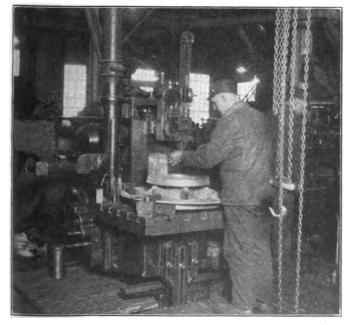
A Morton Drawcut Shaper Comes in Handy for an Awkward Short Planing Job on the Back Cylinder Head
